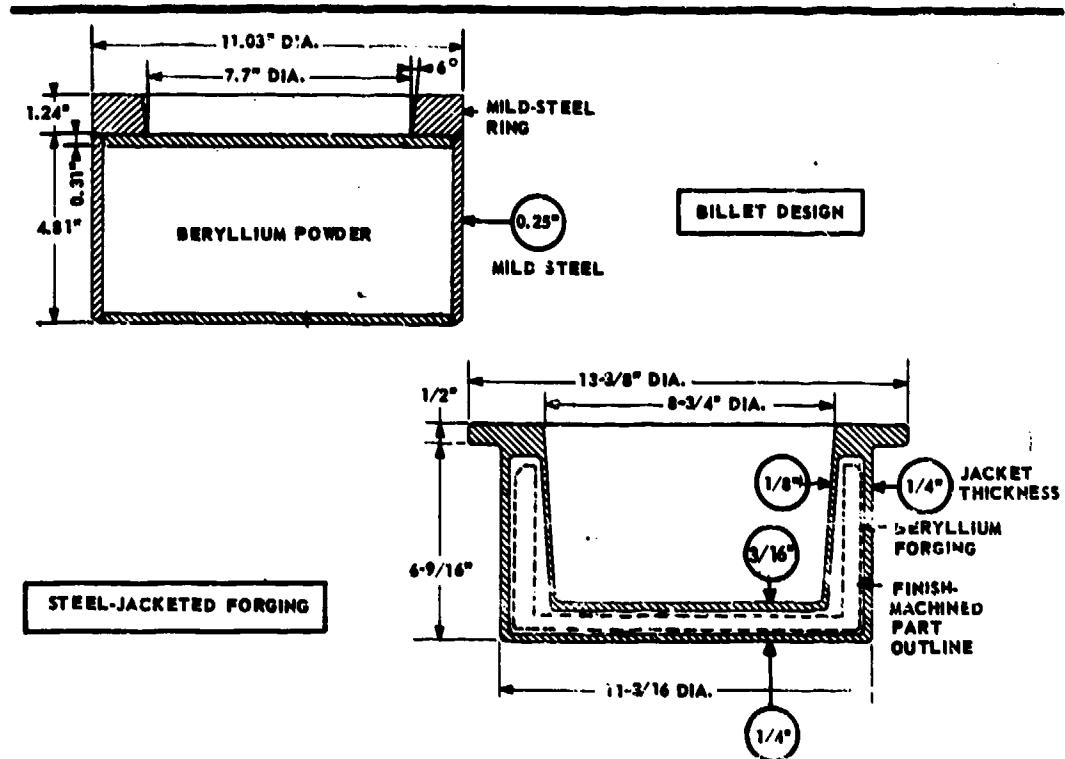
DETAILS OF CANNED-POWDER BILLET DESIGN FOR FORGING A BERYLLIUM CUP SHAPE⁽¹²⁾
